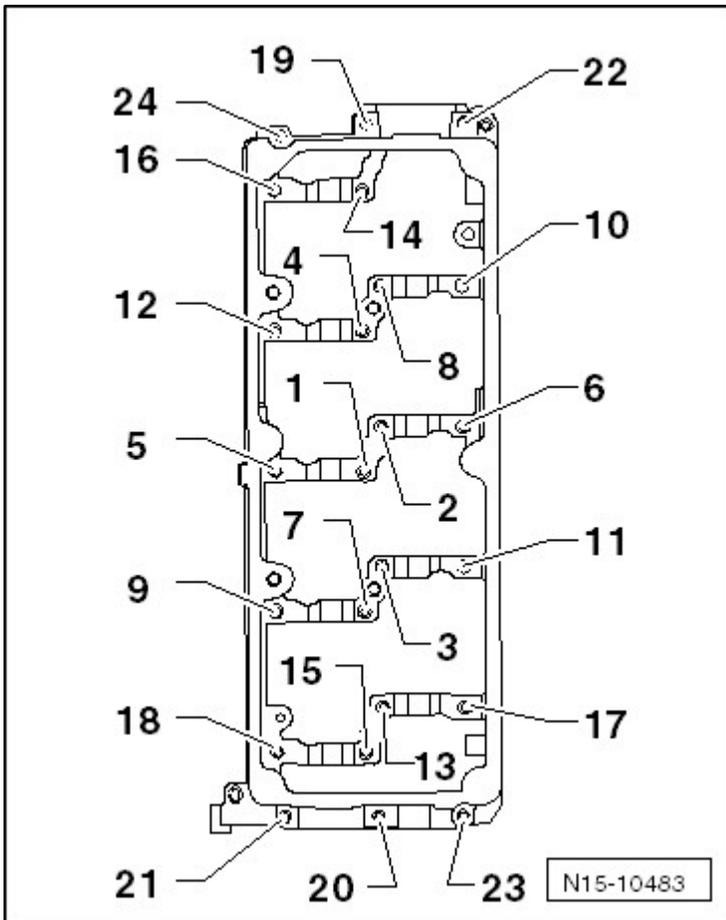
Identifying Bearing Frame Bolts/Nuts Tightening Sequence
